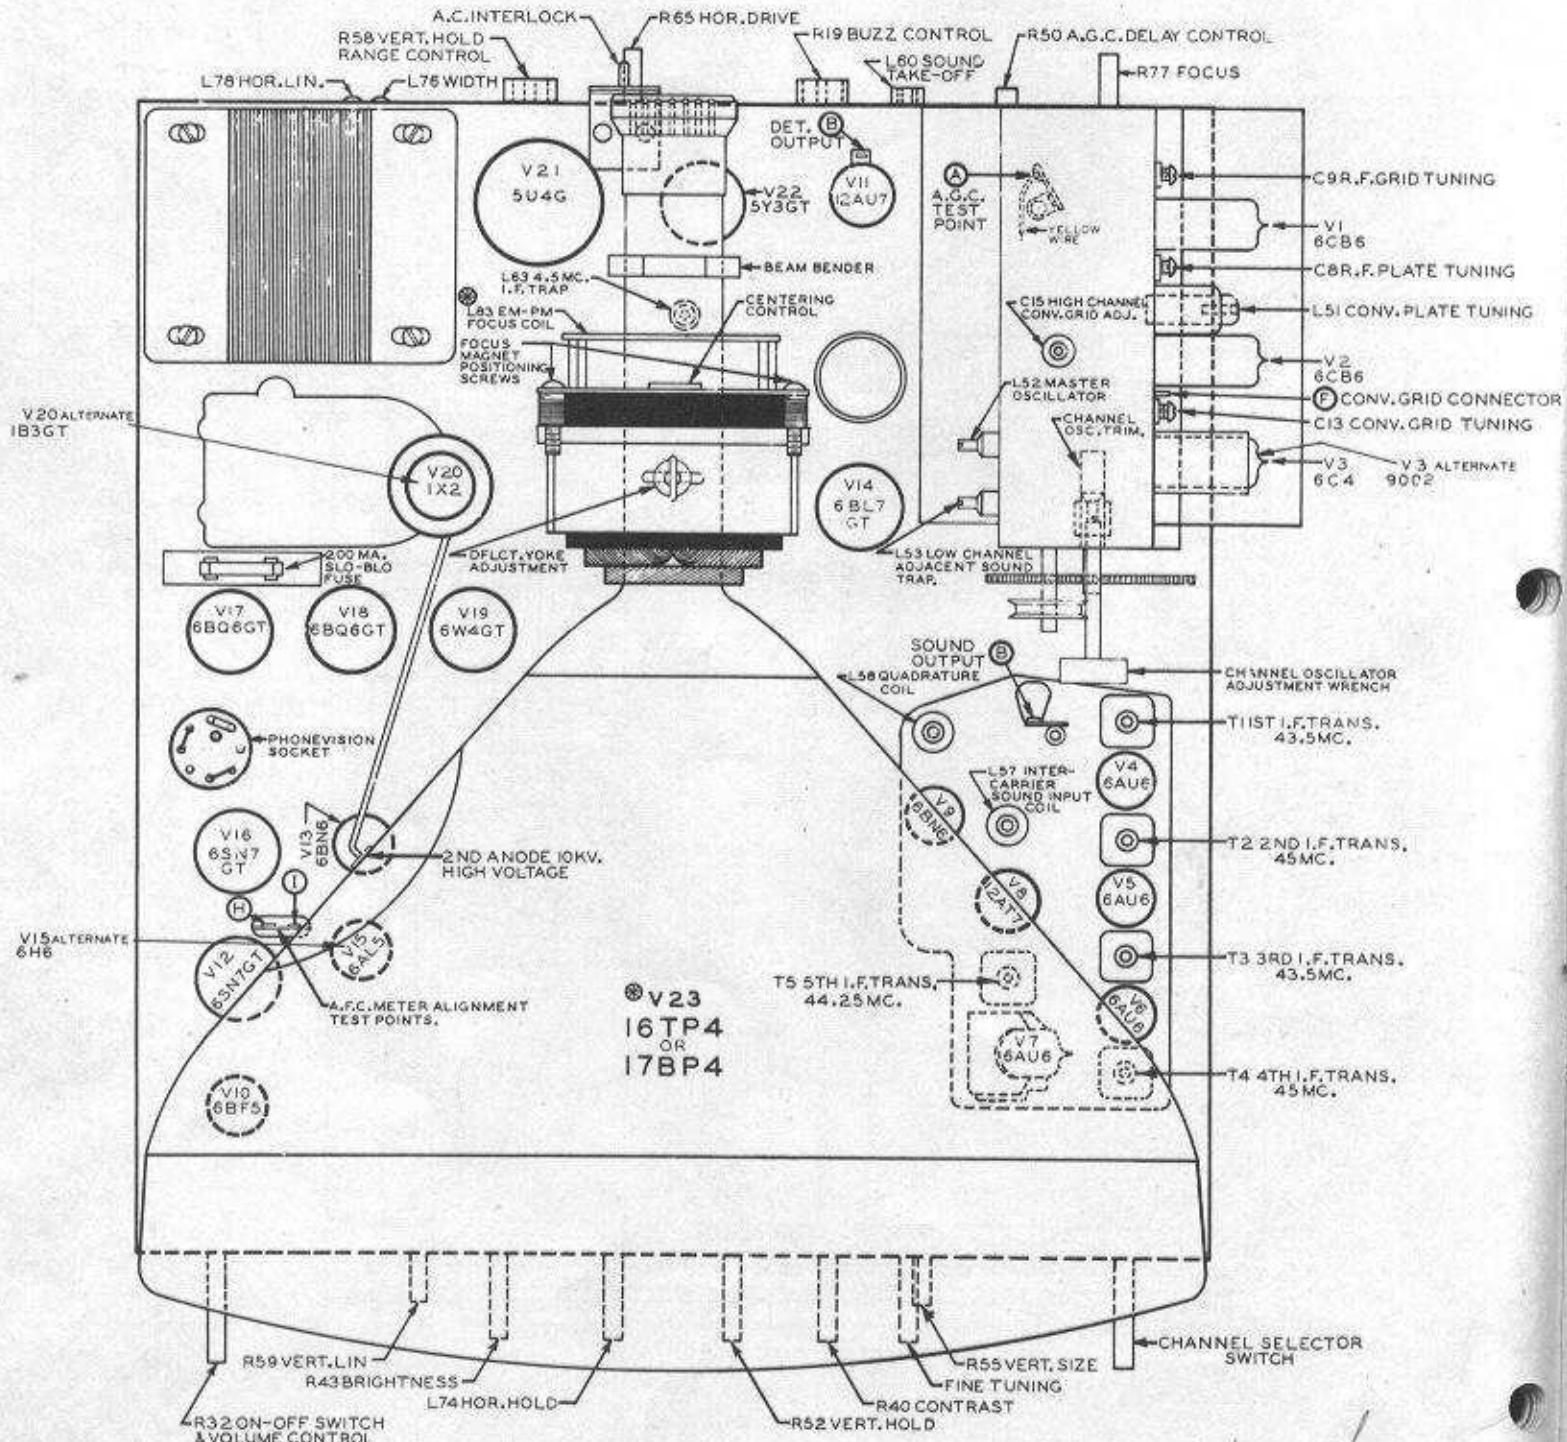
Tube and Trimmer Layout 23H22Z Chassis.
